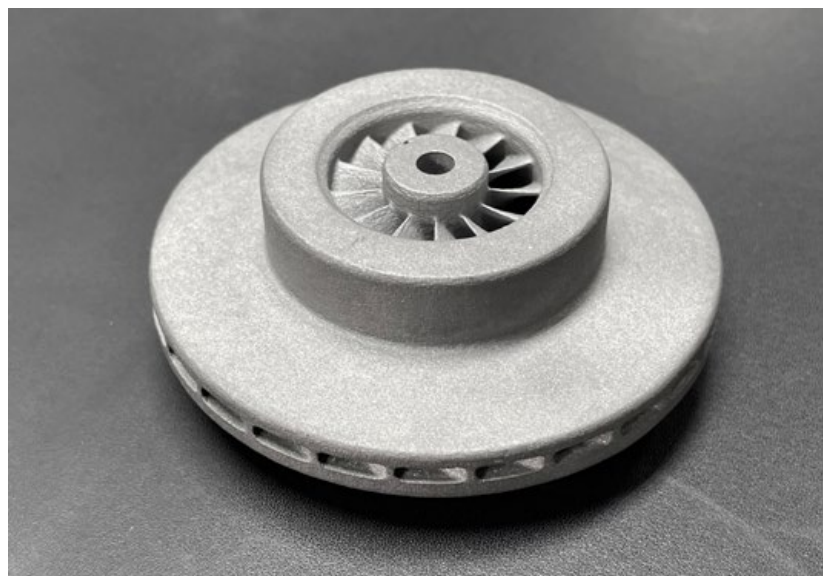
A demonstration BJT impeller produced by TriTech Titanium Parts (Courtesy Desktop Metal)
